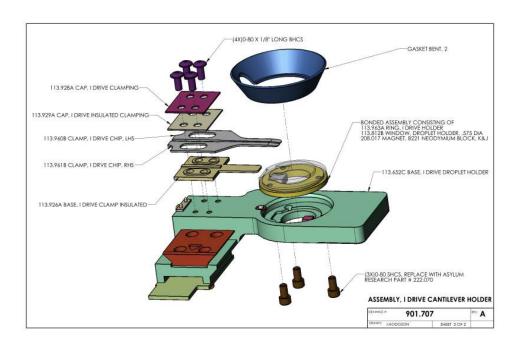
Droplet Cantilever Holder Assembly Overview
